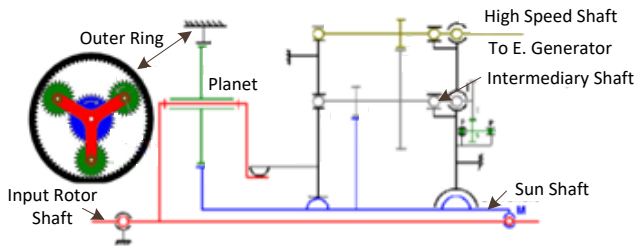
Drivetrain of a commercial wind turbine involving a planetary gearbox and supporting ball bearings [6]
